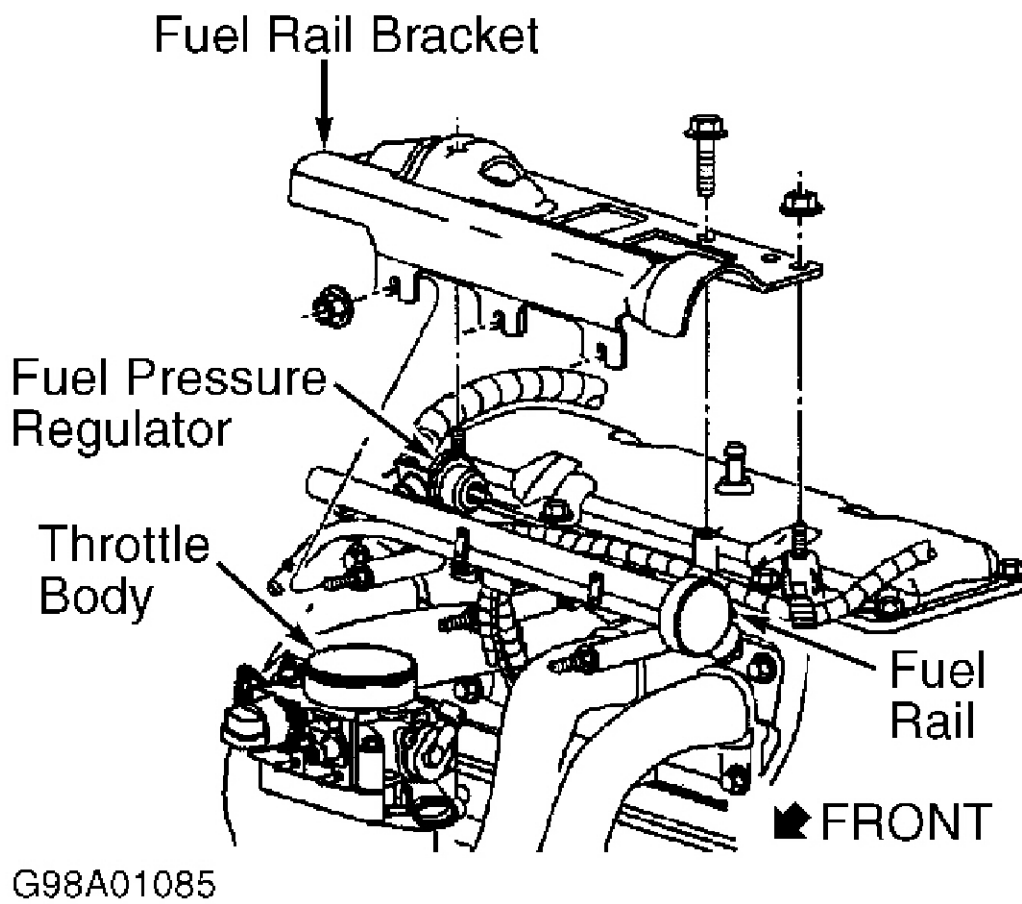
Locating Fuel Rail Assembly Components (2.2L - VIN 4)
